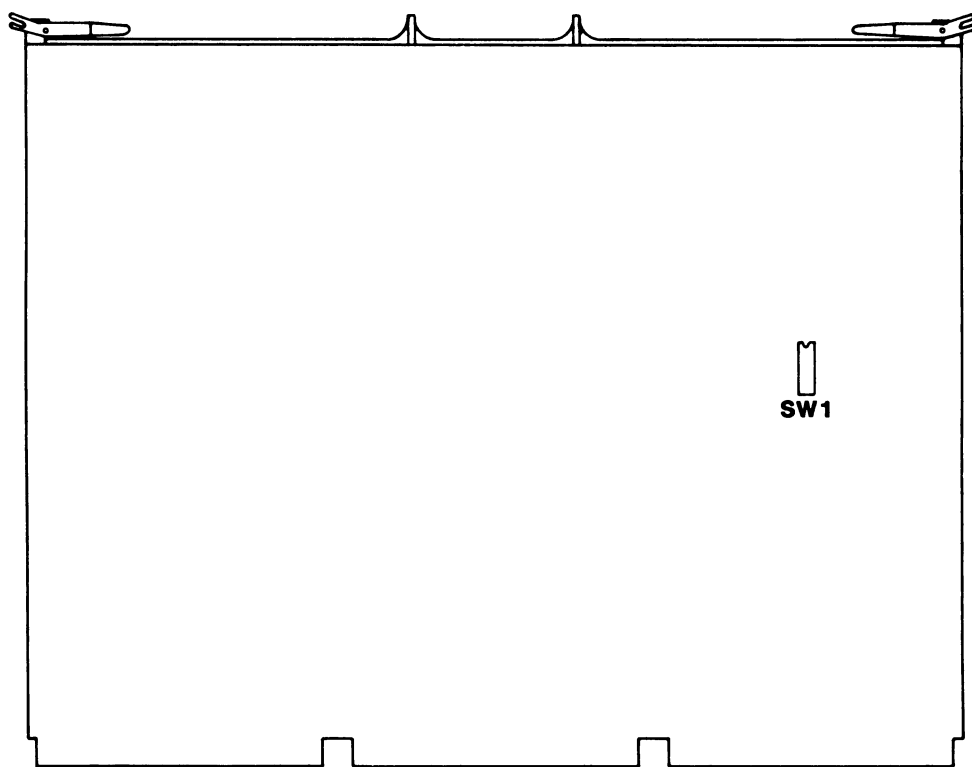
Configuration Record Sheet (SH 1 of 3)
